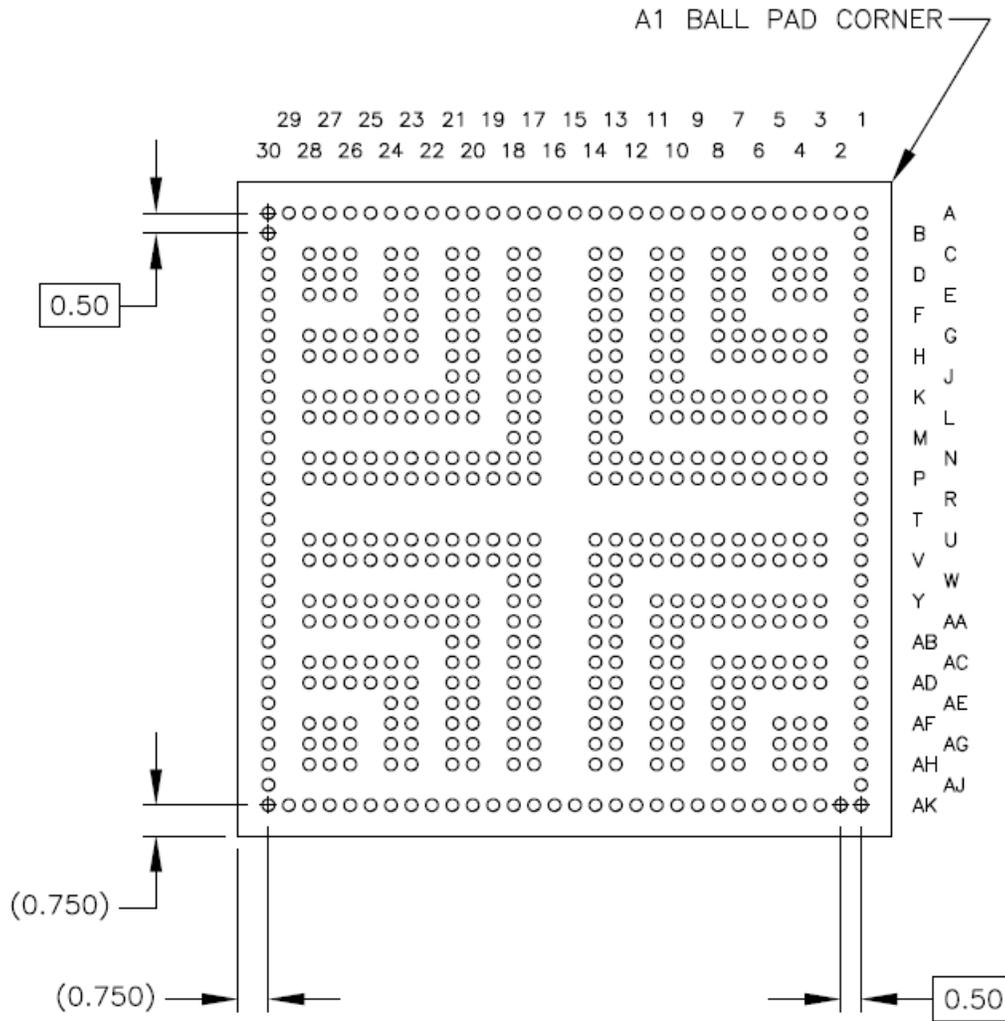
MPFS250T/MPFS160T/MPFS095T-FCSG536 Package Bottom-View
